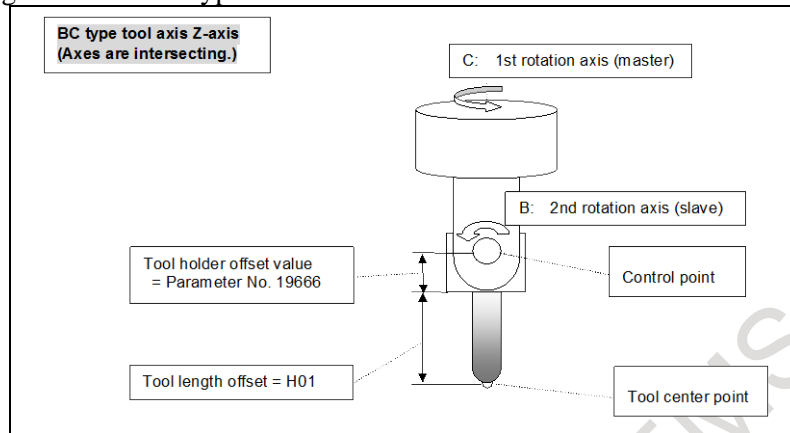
(f) Example of operation on a machine of tool rotation type
